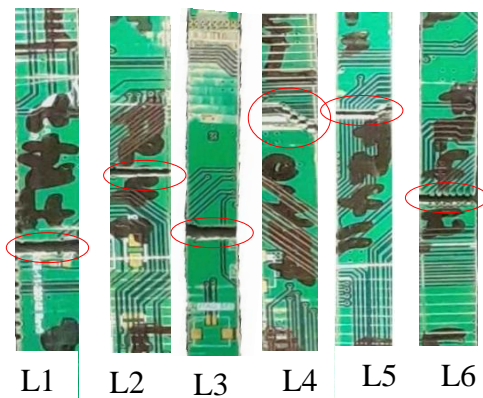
Fracture FR-4 specimen tested along the 0° fibre axis
